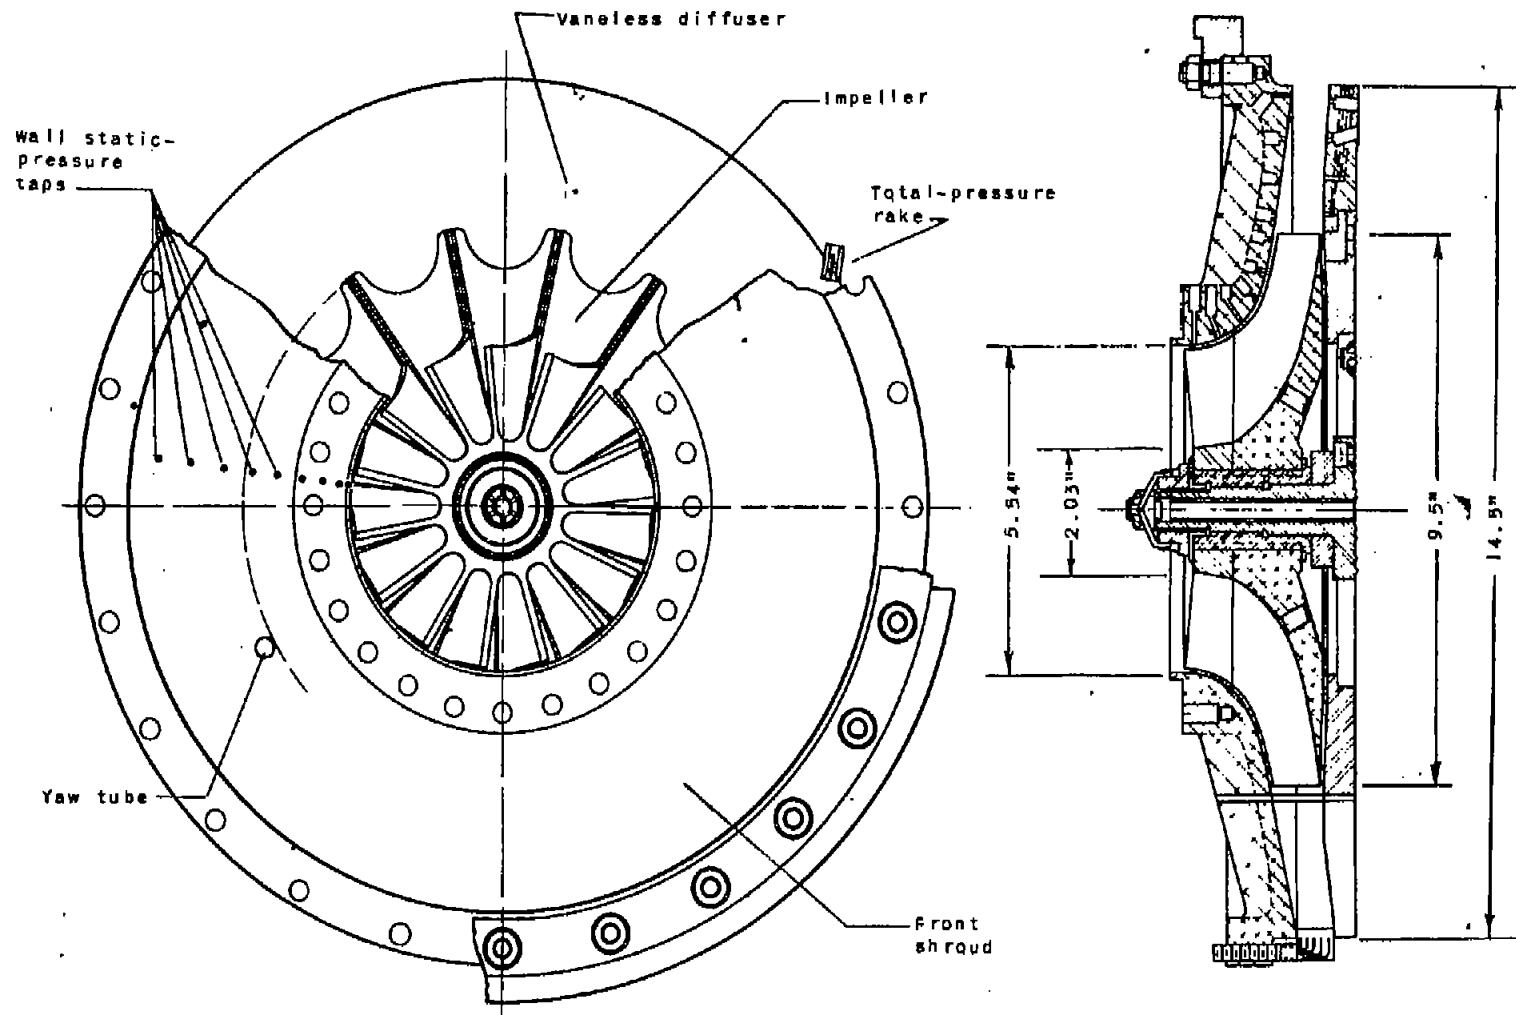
Drawing of V-1710-93 engine-stage impeller and constant-area vaneless diffuser showing instrumentation.
